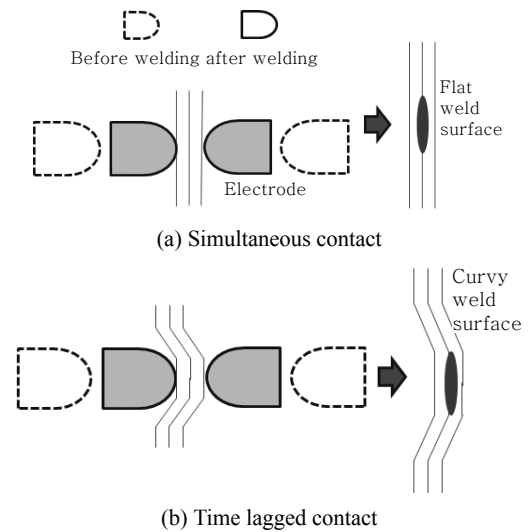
Reason of curvy surface weldment which is protruded by robot and welding gun
